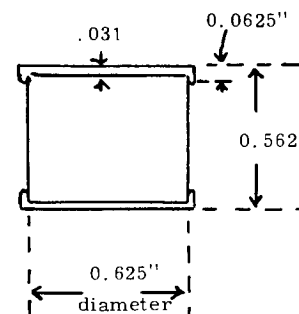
Alumina Insulator With Metal Cap. (Cross Section).
